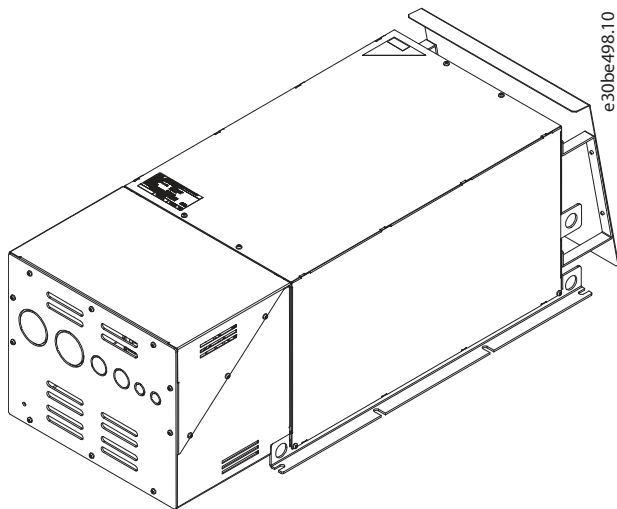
IP21 X5-V3 Internal and External Fan, 3D View
